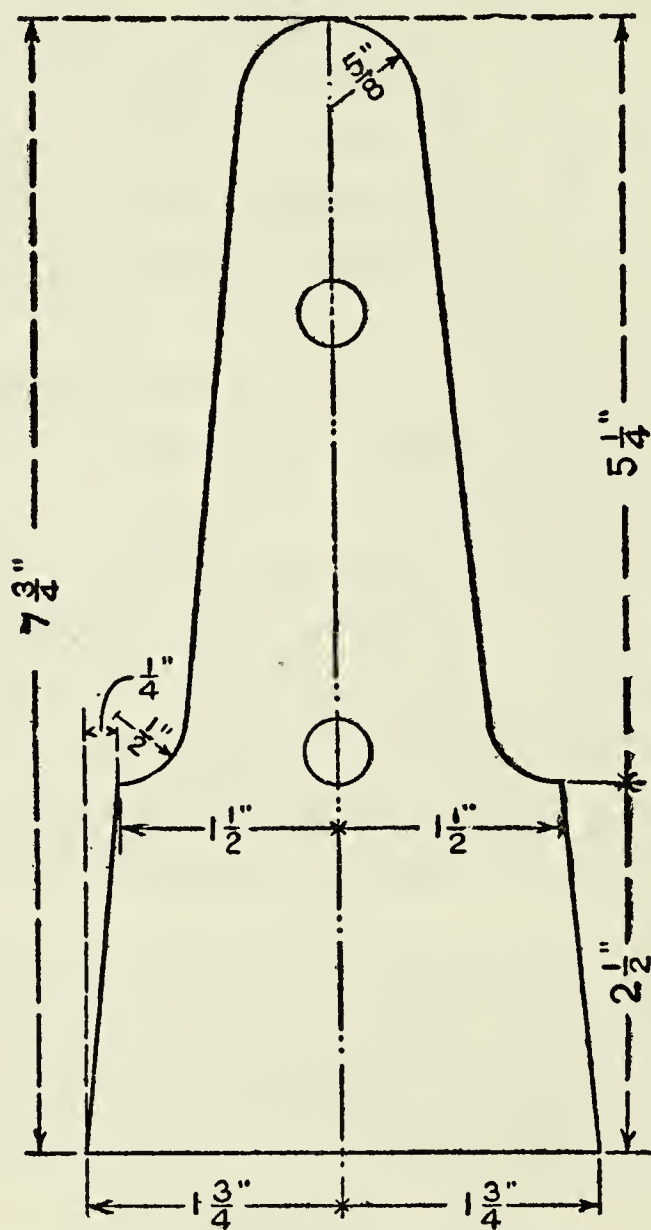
PATTERN FOR THERMOMETER BOARD SHOWN IN FIGURE 61
